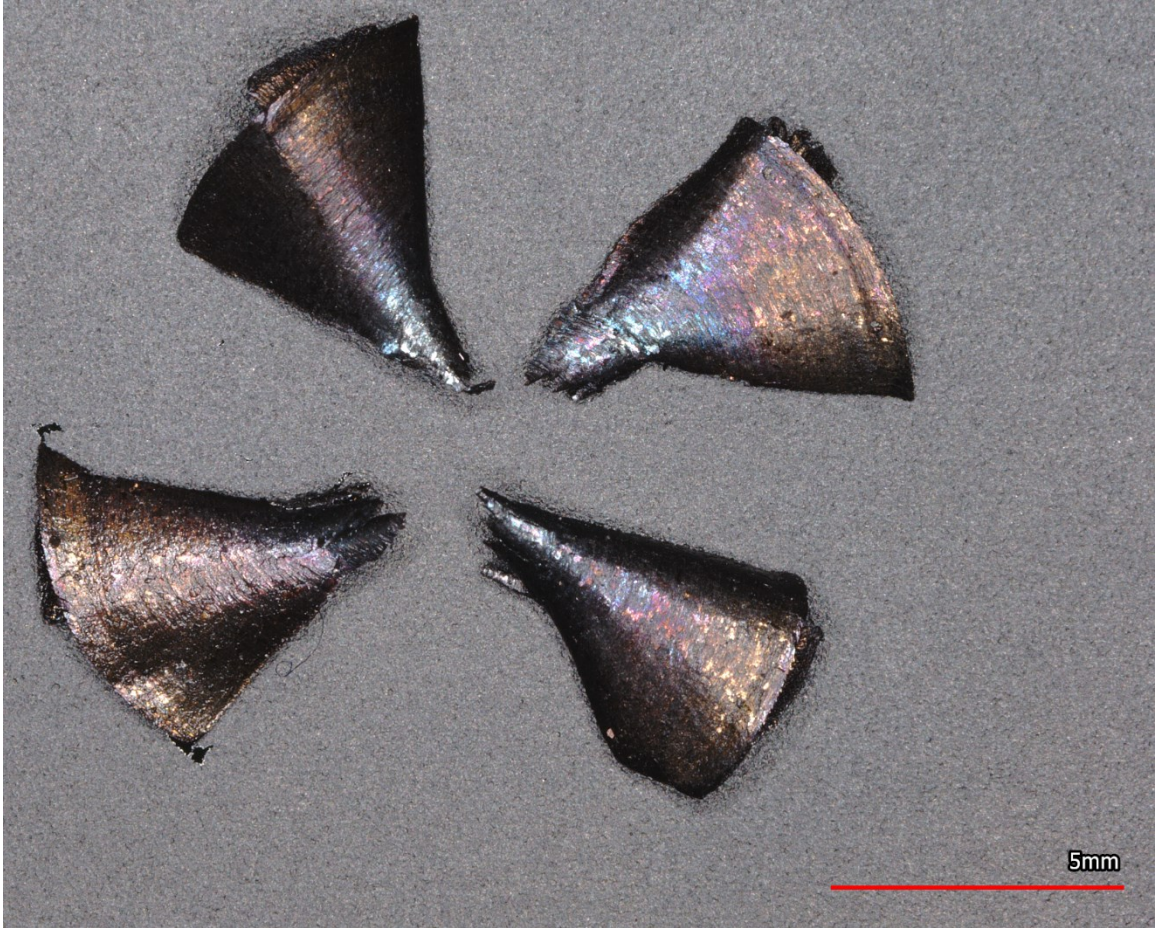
Segmented chips from drilling flipped. Coloring indicates chip carried heat away from the machining area. Also suggests that through spindle coolant may be necessary to properly cool and lubricate the tool when deep drilling and tapping.
